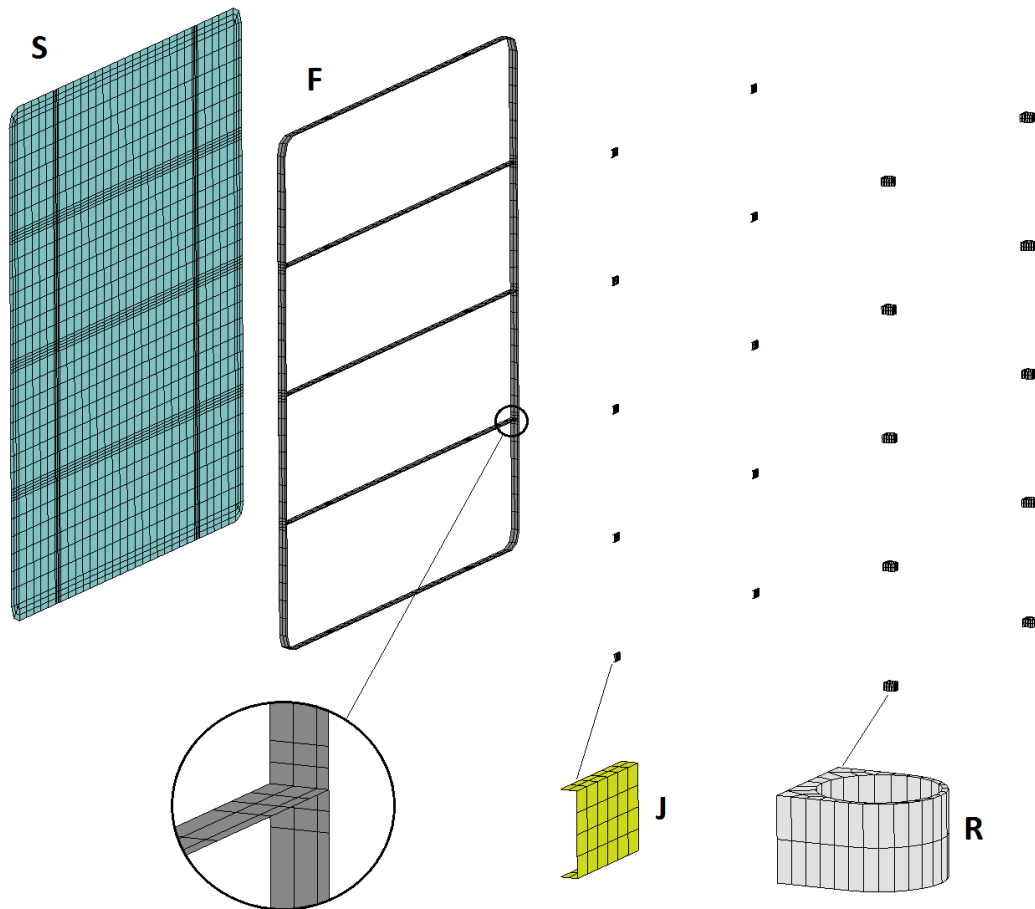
Exploded view drawing of the sign, the frame and the connection parts. Upper: sign assembly. Lower: mesh details of the frame and connection parts.
